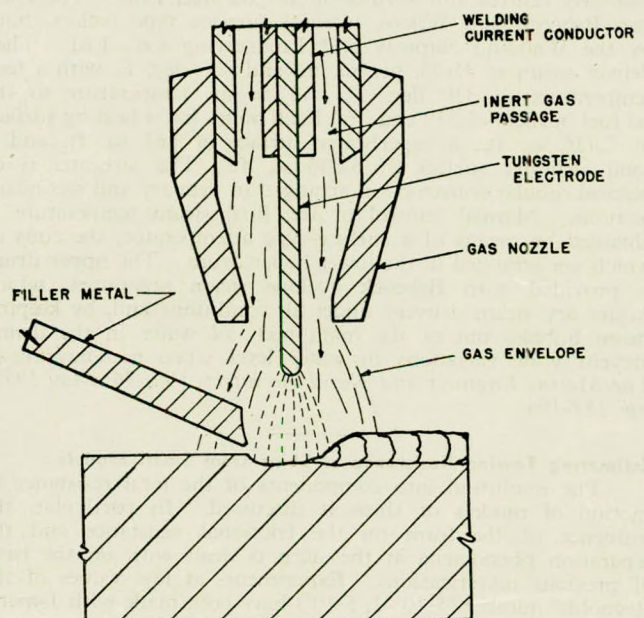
Inert-gas-shielded tungsten arc welding (non-consuming type electrode)
